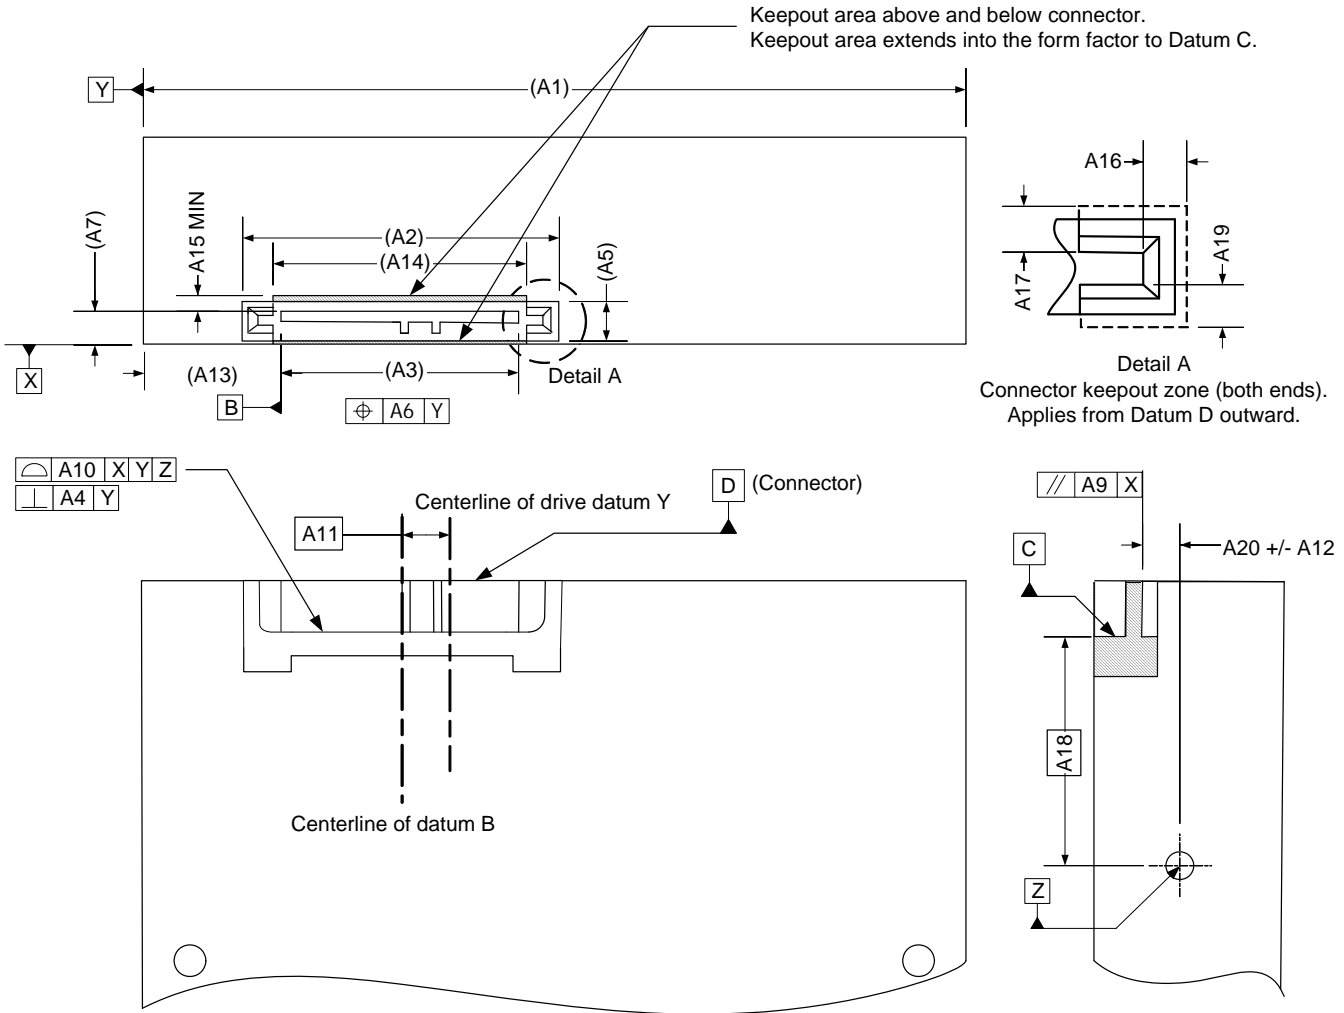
OPTION B: SERIAL CONNECTOR REFERENCED TO SIDE MOUNTING SCREW
